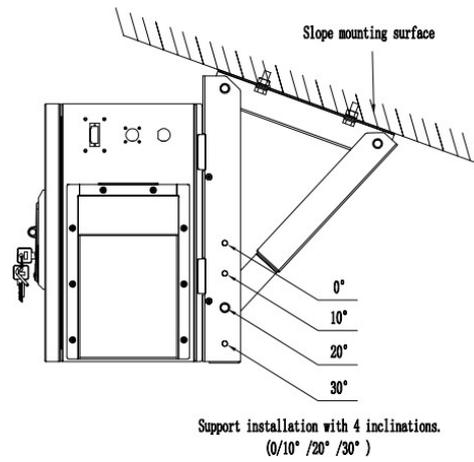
Diagram of Adjustment Angle of The Installation Plate
